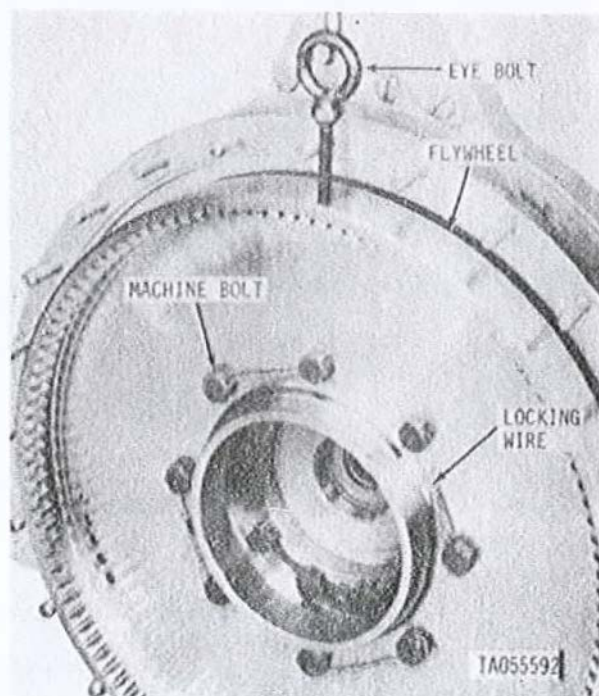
Removing or installing flywheel, model AVDS-1790-2DR engine.
